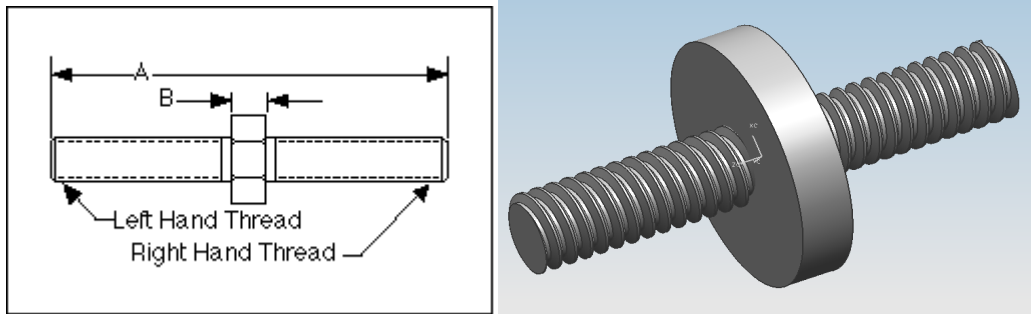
SCREW HAS RIGHT AND LEFT HAND THREAD
